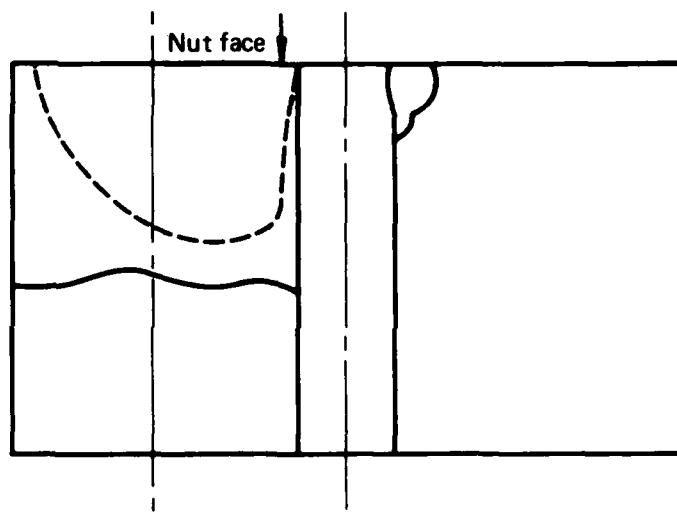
(d) FRACTURE SURFACES: SPECIMEN TYPE (D)
